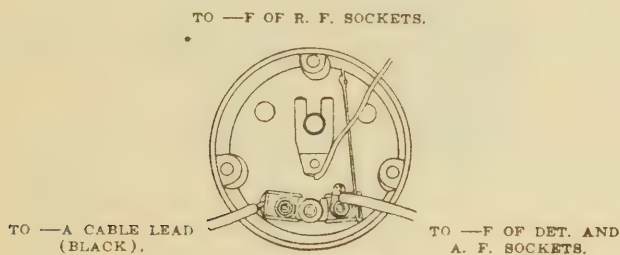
REAR VIEW OF RHEOSTAT AND FILAMENT SWITCH ASSEMBLY USED IN MODEL 35.
